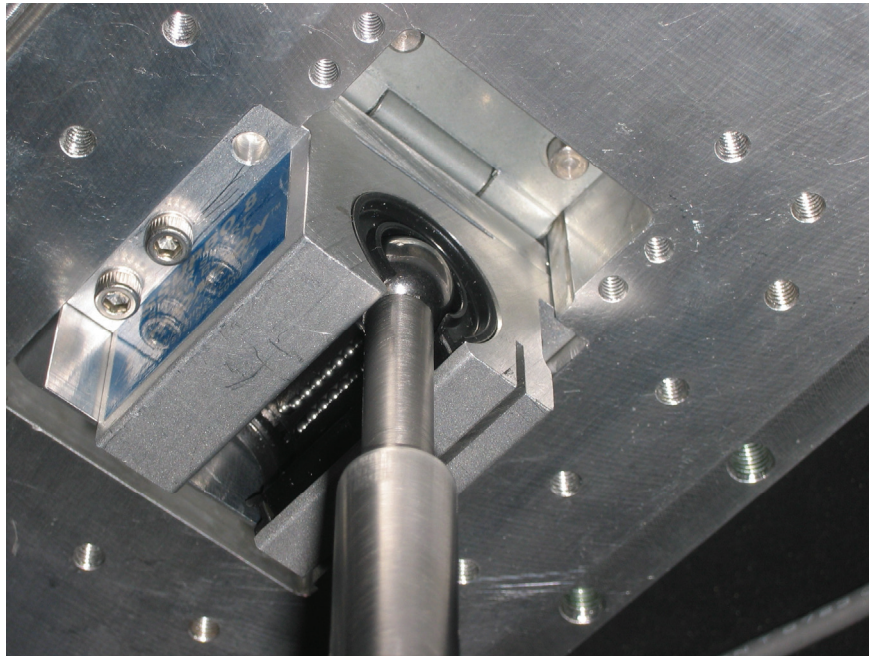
Ball bearing and shaft mounted inside open linear ball bearing.
